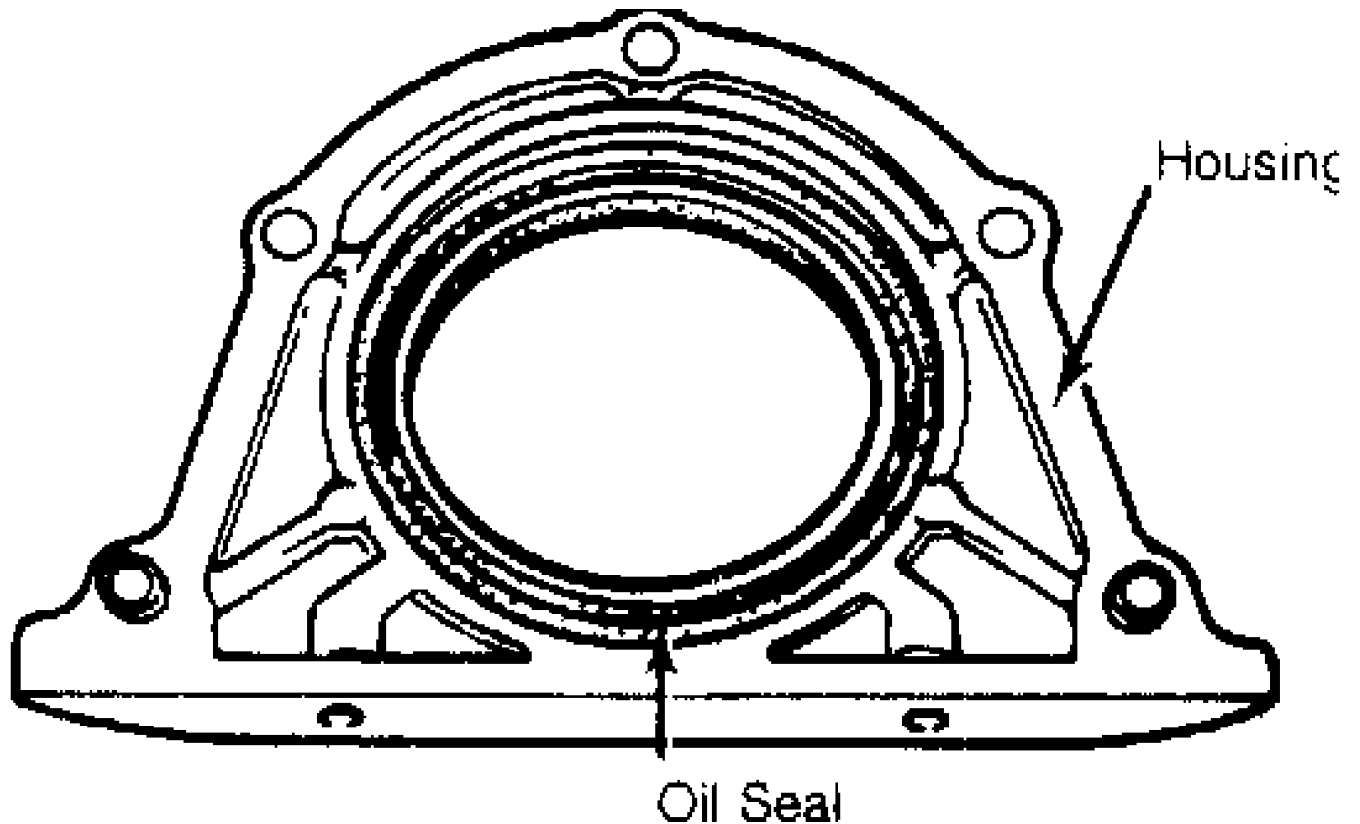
Identifying Rear Crankshaft Oil Seal & Housing
